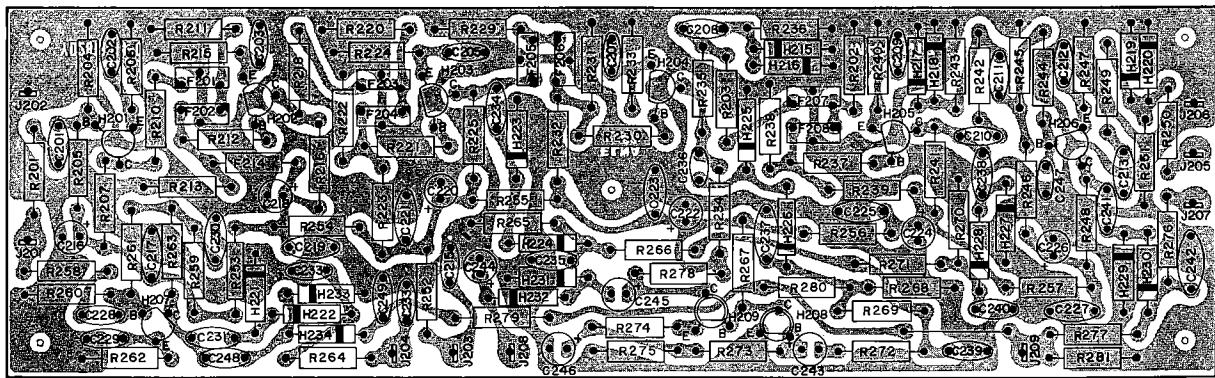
FM IF Amplifier Assembly P200 Component Locations
